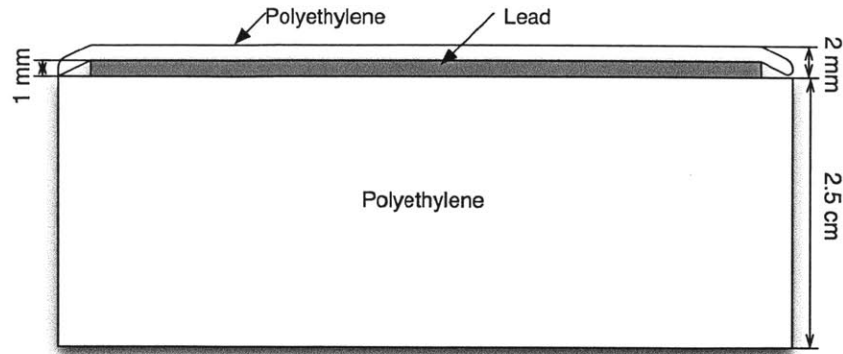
Cross section view of the lead and polyethylene plastic used for shielding.
